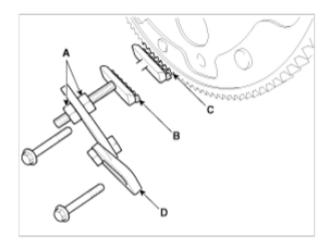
Identifying Ring Gear, Holder, Nuts And Links Courtesy of HYUNDAI MOTOR AMERICA
